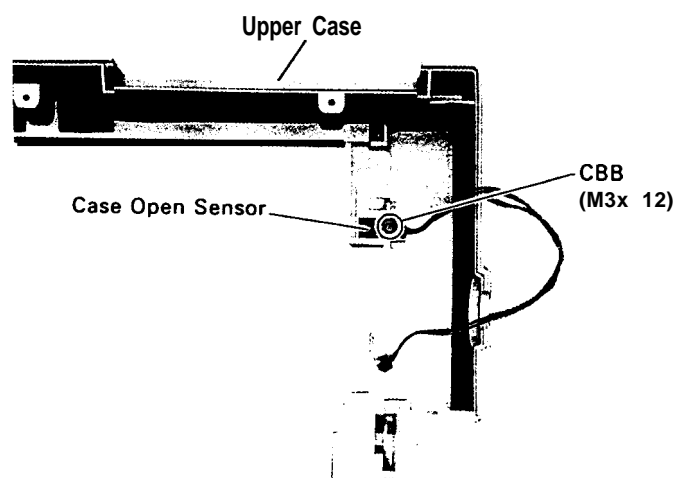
Case Open Sensor Removal (Back of Base Frame)
